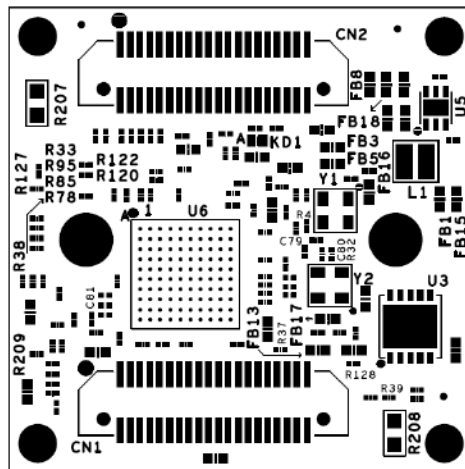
NileCAM21\_CUXVR Camera Module Board Rear View
